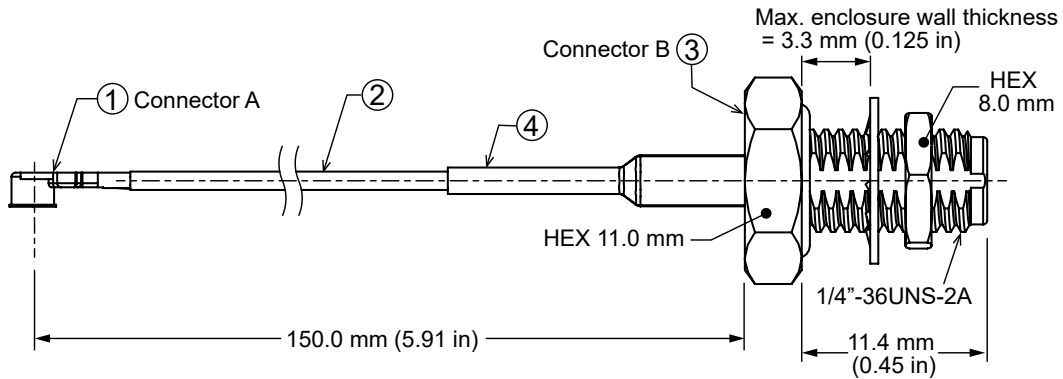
Product Dimensions for the CSI-SGFI-150-UFFR Cable Assembly
